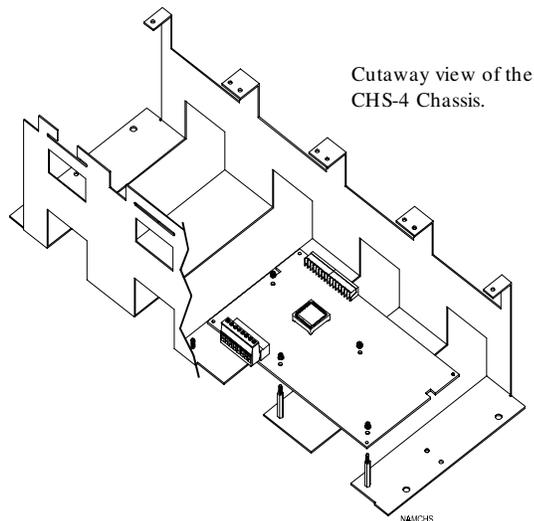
Mounting the NAM-232 in the CHS-4 Chassis
